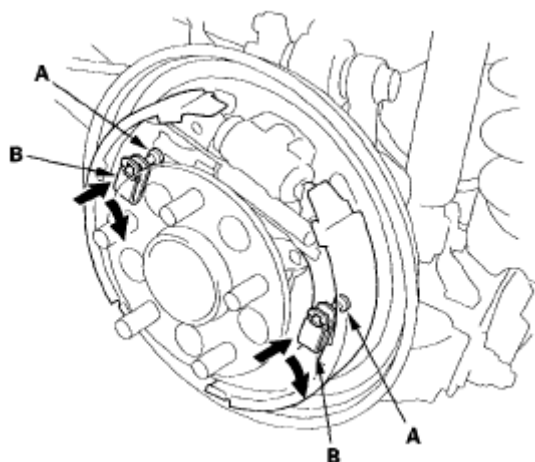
Removing Tension Pins Pushing Respective Retainer Spring And
